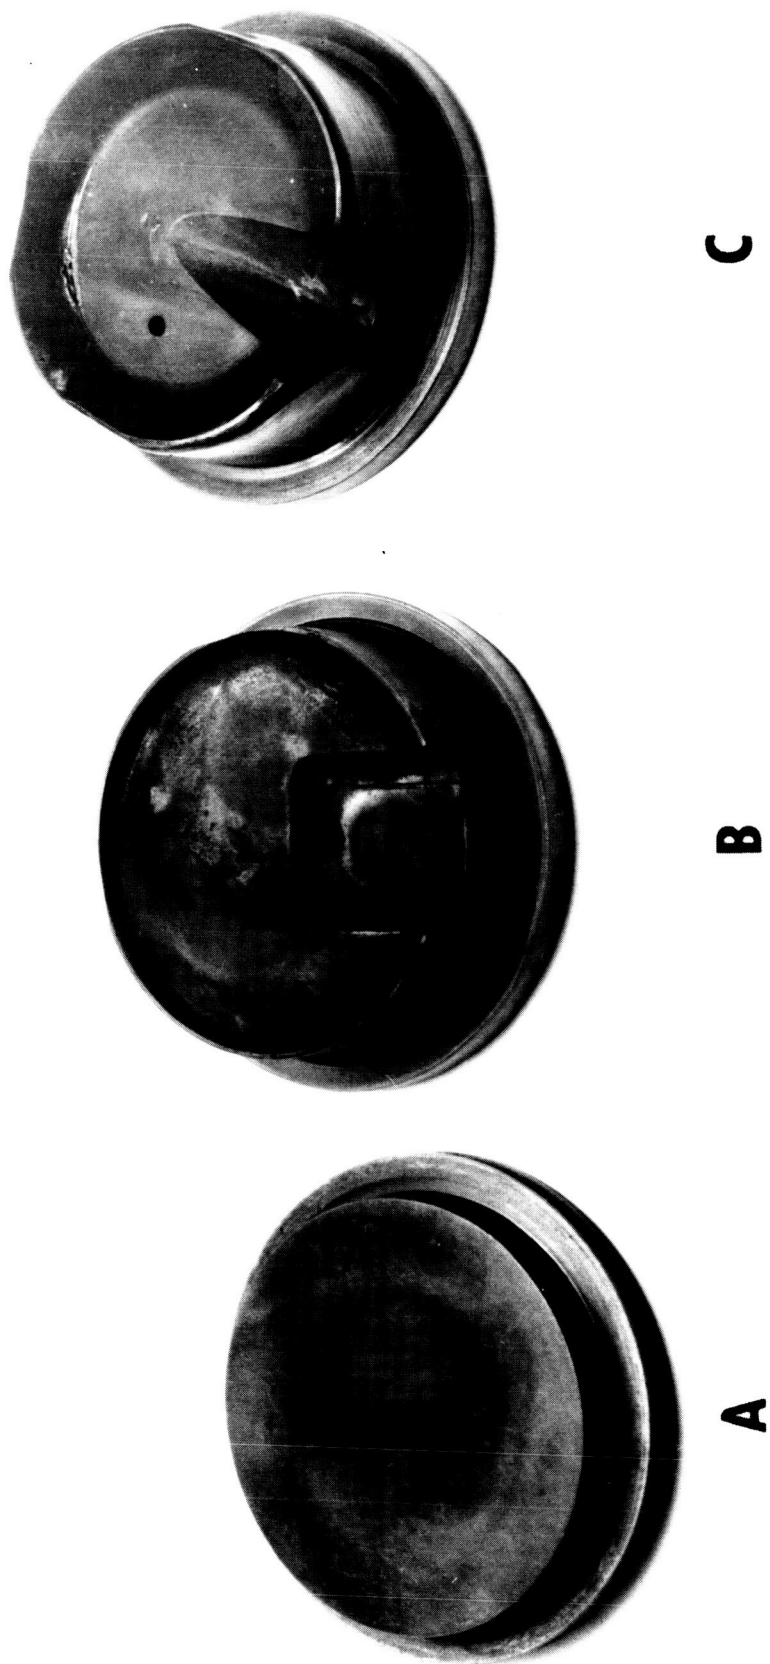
Cylinder Head - Combustion Chamber Evolution
